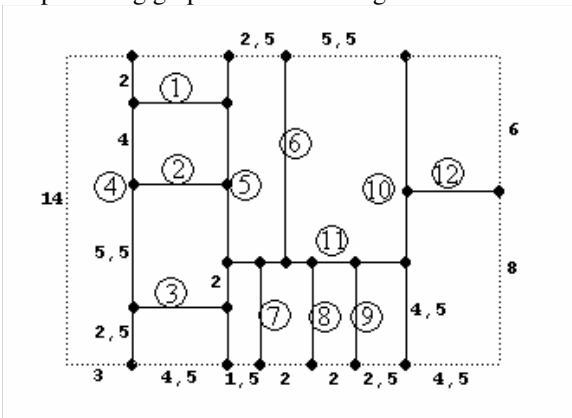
The cutting diagram with the guide mark's dimensions and the cutting numbering
